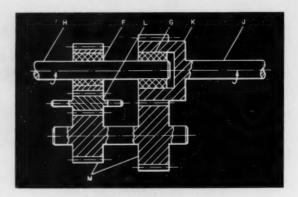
Spur gear set-up designed to accomplish the same purpose as bevel gearing shown in Fig. 1
